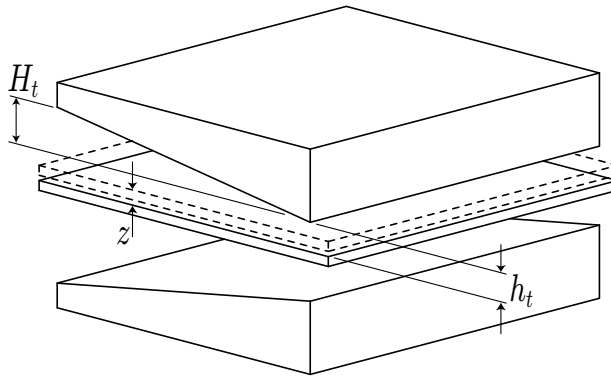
Two tapered hydraulic bearings sharing a common bearing surface.
